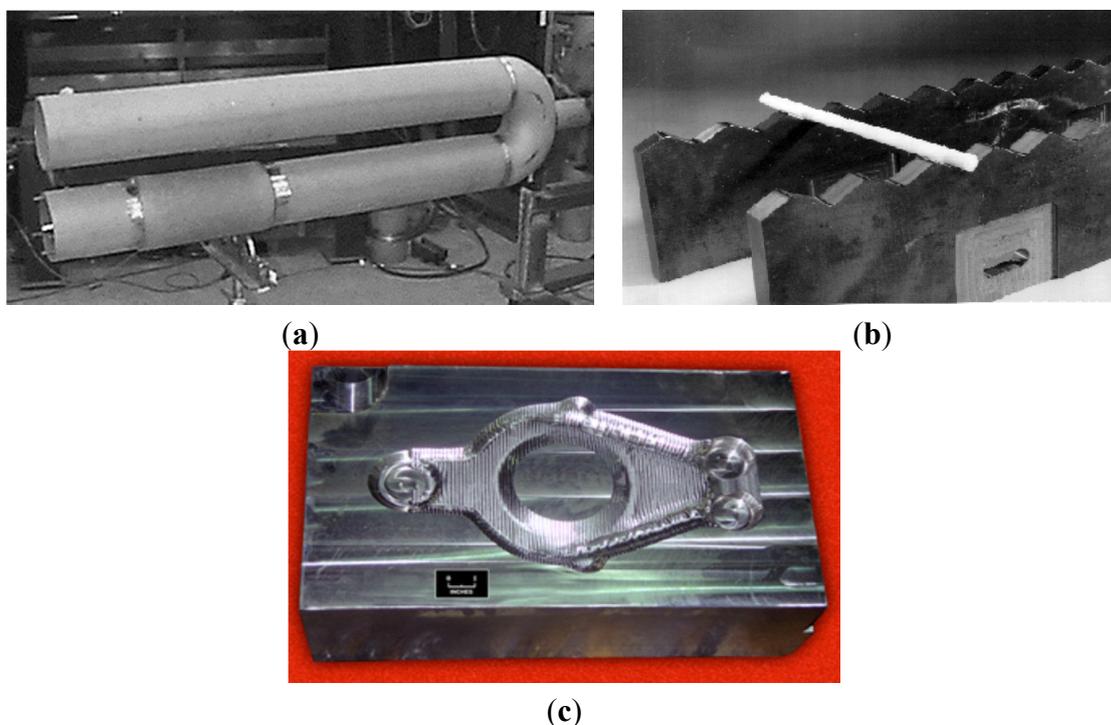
(a) The radiant burner tube made of IC-221M alloy (Weirton Steel Corporation) [99]; (b) walking-beam furnace rails made of IC-221M Ni₃Al-based alloy (Rapid Technologies, Newman) [61] and (c) die block of IC-221M for mechanical forging hot forging (United Defense LP/Steel Products Division) [101] (Courtesy of Oak Ridge National Laboratory, U.S. Department of Energy).
